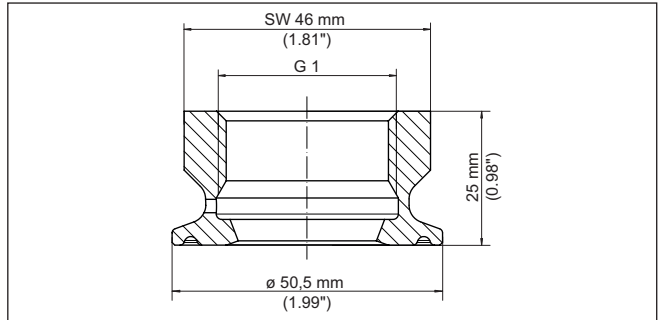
Dimensions hygienic adapter G1 (DIN 3852-X) on Clamp 1½" (DIN 32676, ISO 2852) PN 40 - Cone seal
